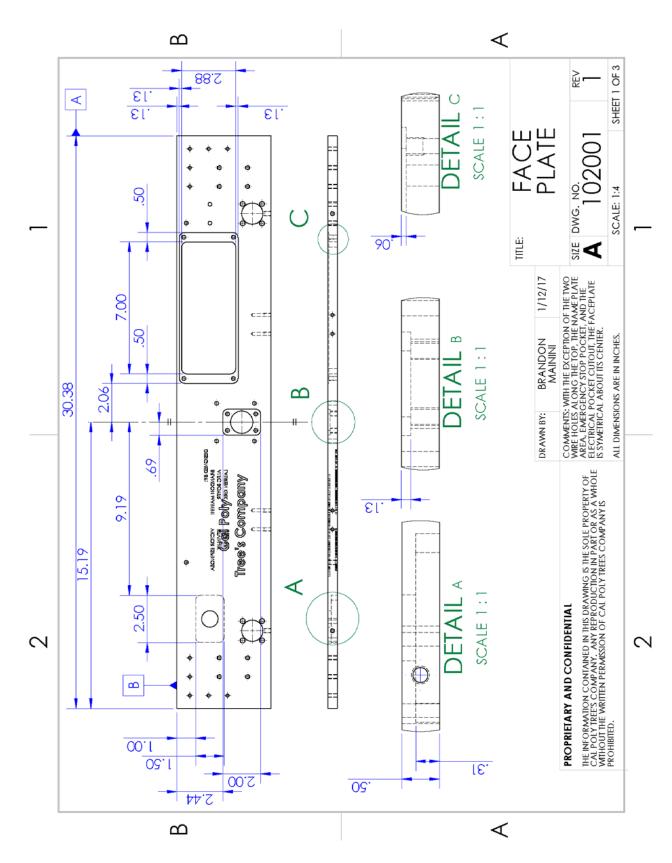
Face Plate Detail Drawing Sheet 1 of 3
